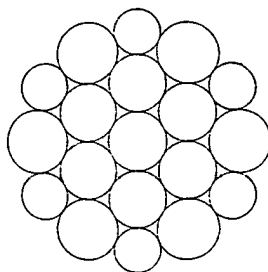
Cross section of a Warrington-type strand (6+6+6+1) wires
